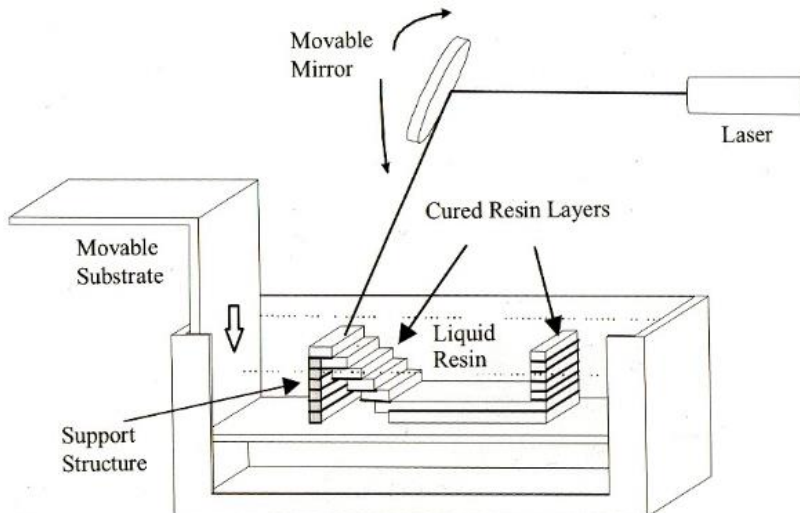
Schematic diagram of a typical stereolithography machine [25]
